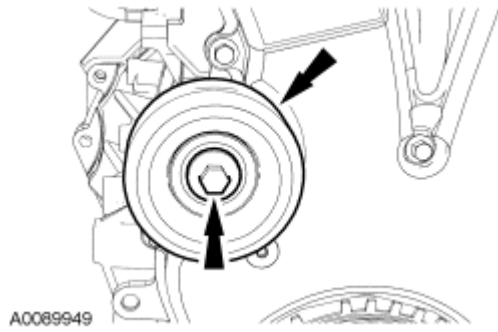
Locating Accessory Drivebelt Idler Pulley And Bolt
